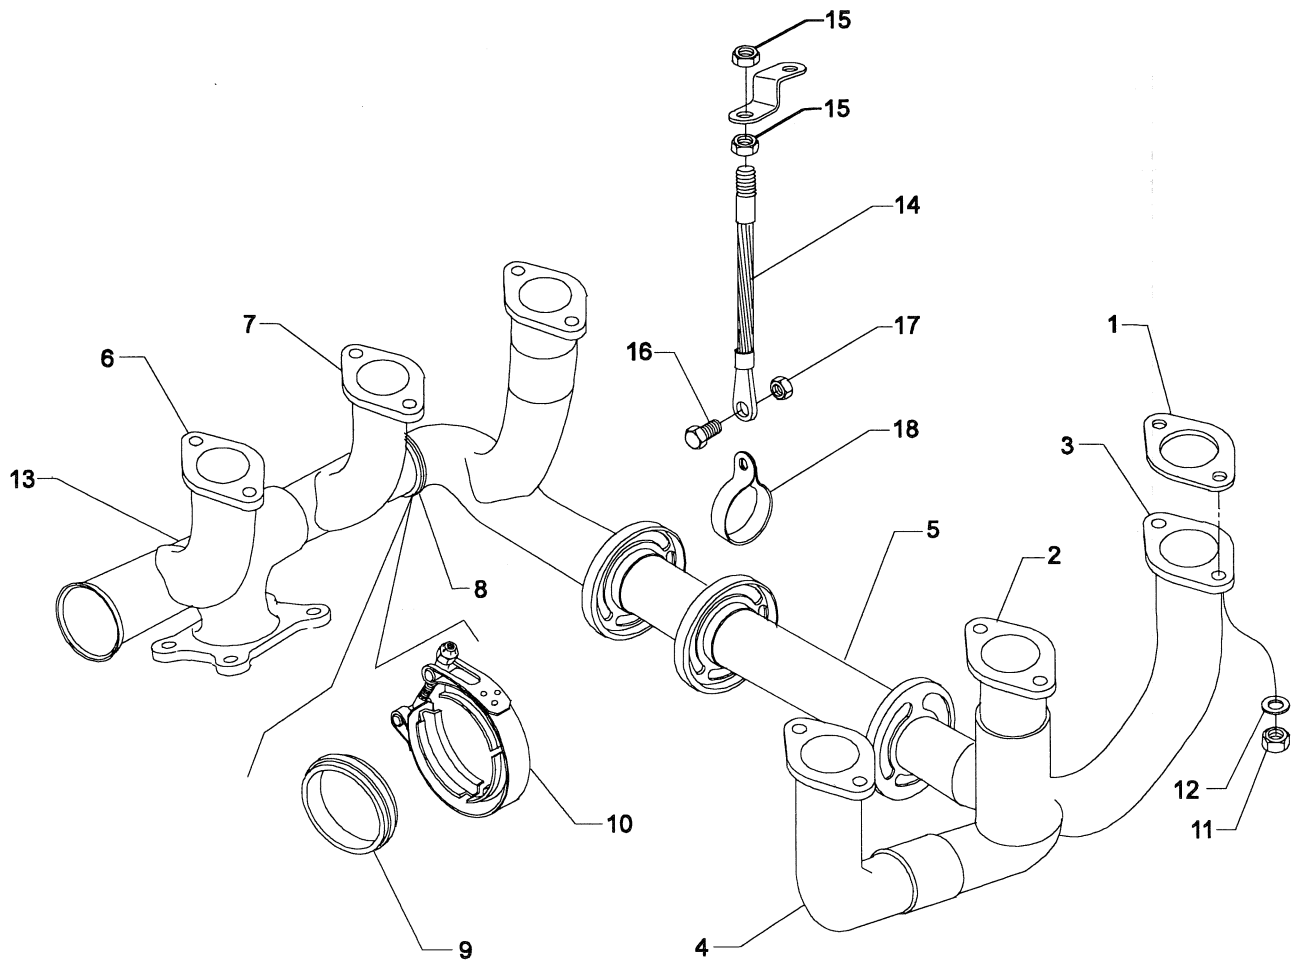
EXHAUST PIPES AND TRANSITION ASSEMBLY
